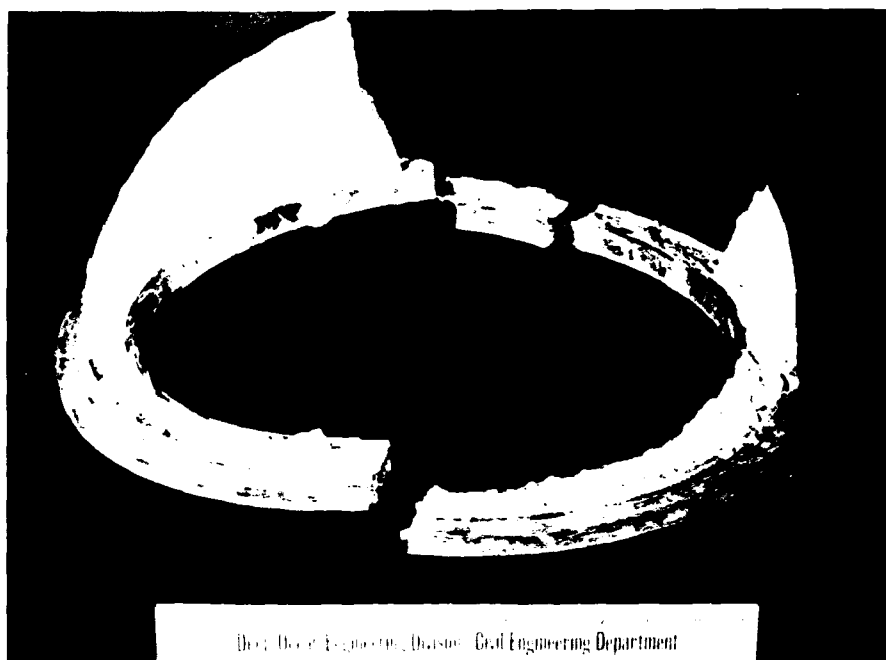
Fractured polycarbonate plastic joint ring after implosion testing of sphere assembly.
